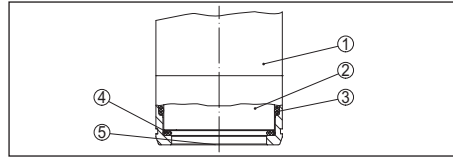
Front-flush installation of the CERTEC® measuring cell with double seal
